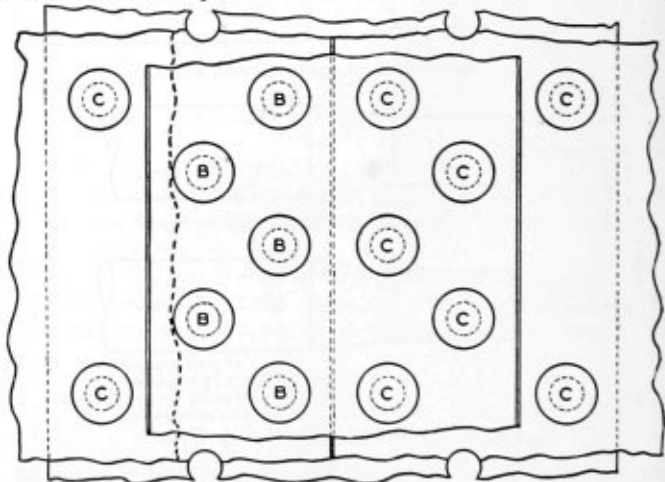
Double Riveted Lap Joint Changed to Triple Riveted Butt Strap Type
